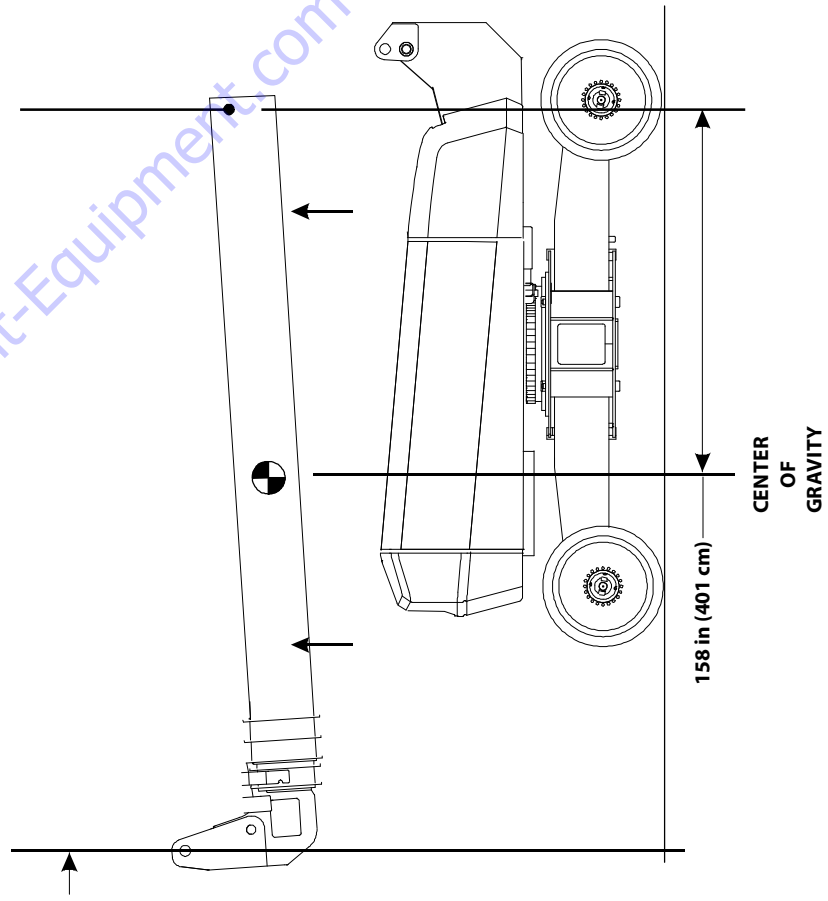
Swing Bearing Removal - Sheet 3 of 4
